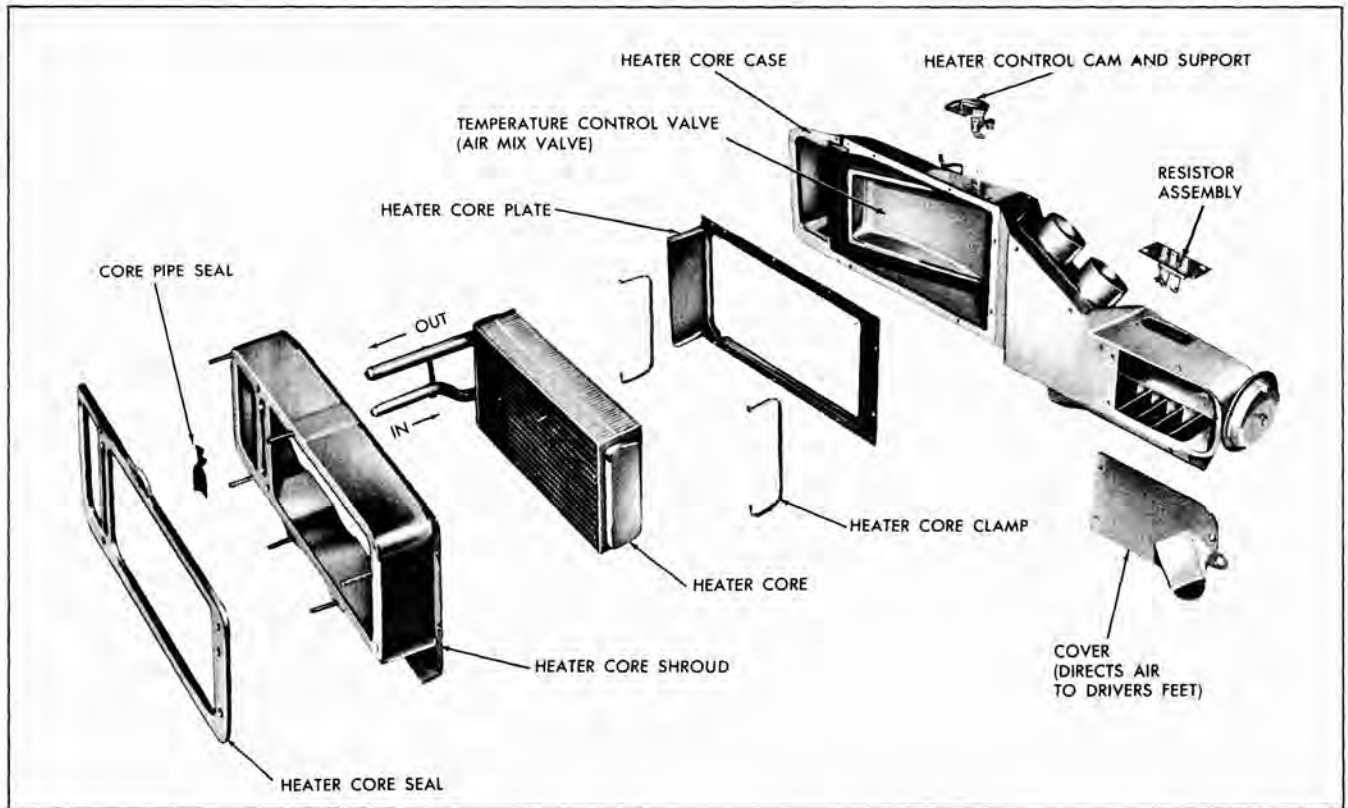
Circ-L-Aire Heater Core and Case Assembly (Heater Only)—Exploded View
